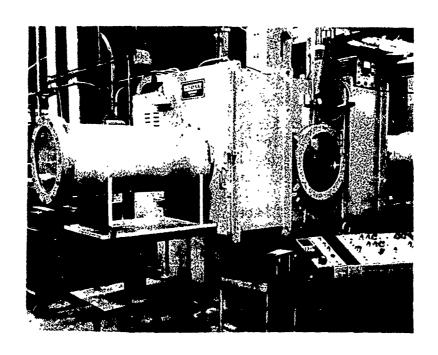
EB WELD CHAMBER EXTENSIONS
